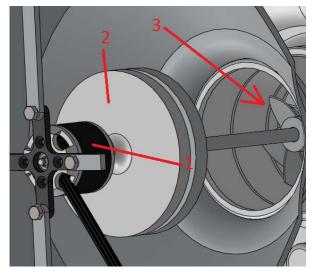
Schema of double shafts ETC. 1-Motor/Generator. 2-Magnetic Joint. 3-Compressor intake.
